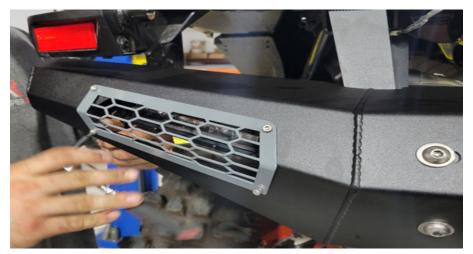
Fasten Light Covers to Main Bumper Body using 11/32" Wrench and 9/64" Allen
